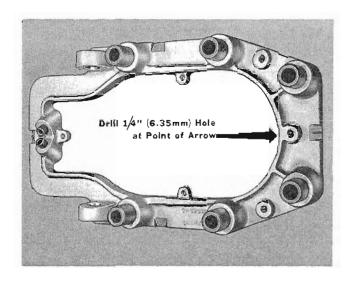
Location of Hole to Be Drilled When Using C-91-32924A1 Transom Drilling Fixture
